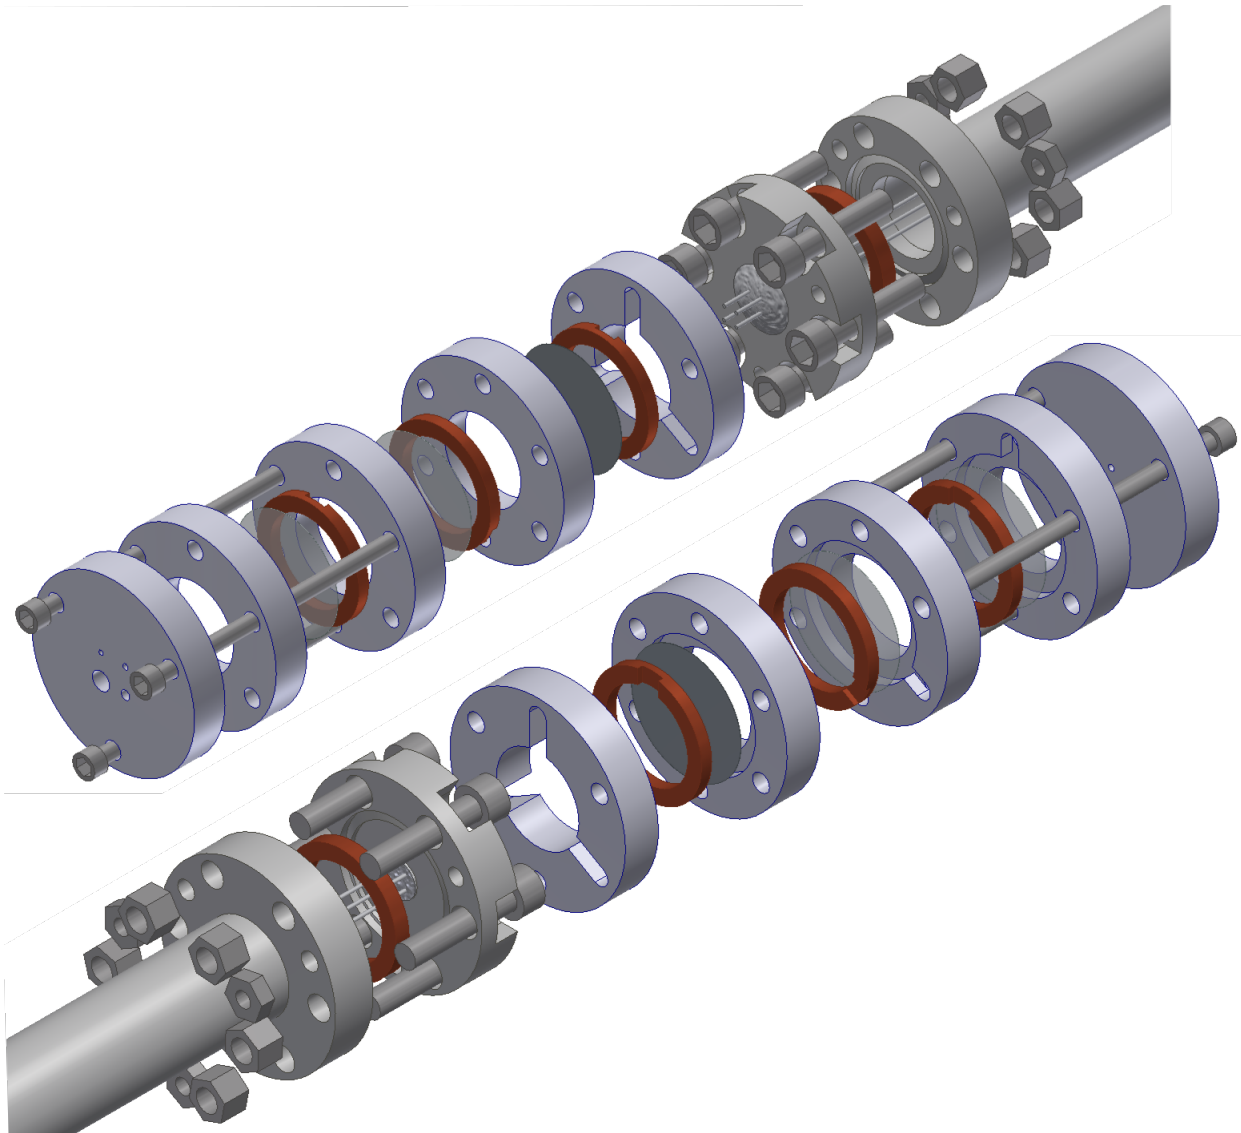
An exploded view of the Mochi.GEA, including two grids and an aperture.
